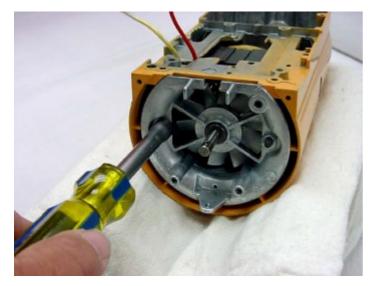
Tighten the two nuts on the stator studs to seat the bearing bracket.
